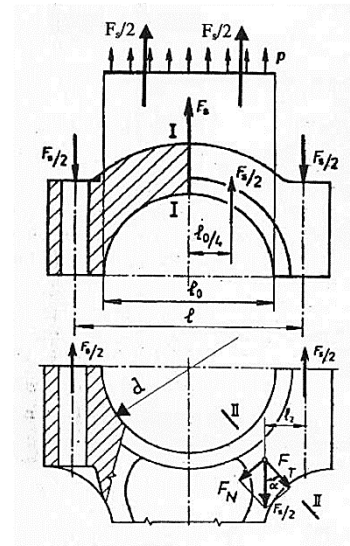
FORCES ACTING ON LOWER HEAD OF CONNECTING ROD
